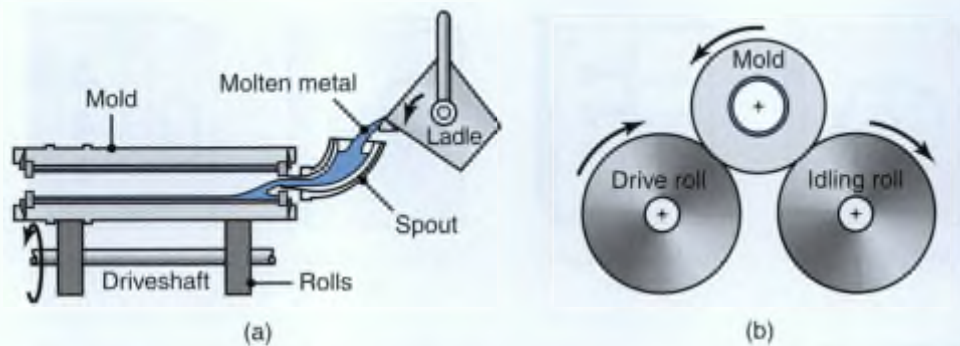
(a) Schematic illustration of the centrifugal-casting process; pipes, cylinder liners, and similarly shaped parts can be cast with this process. (b) Side view of the machine.
